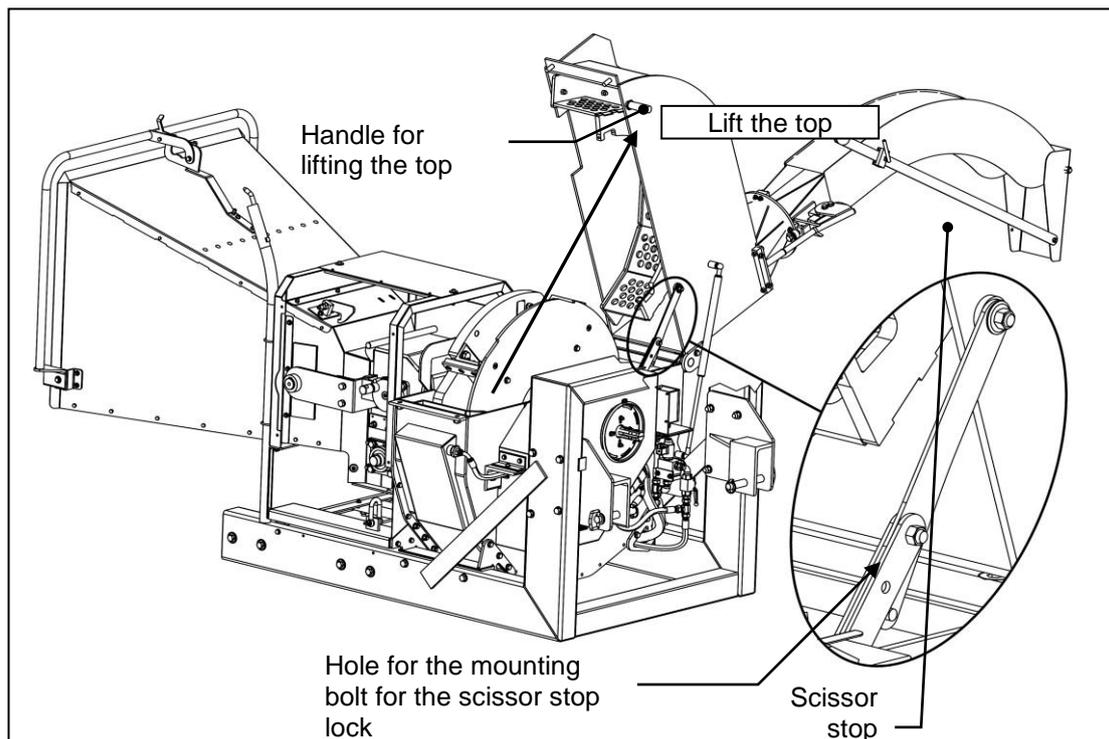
Opening the machine 2 - Lift the top and insert a bolt in the scissor stop if necessary.
